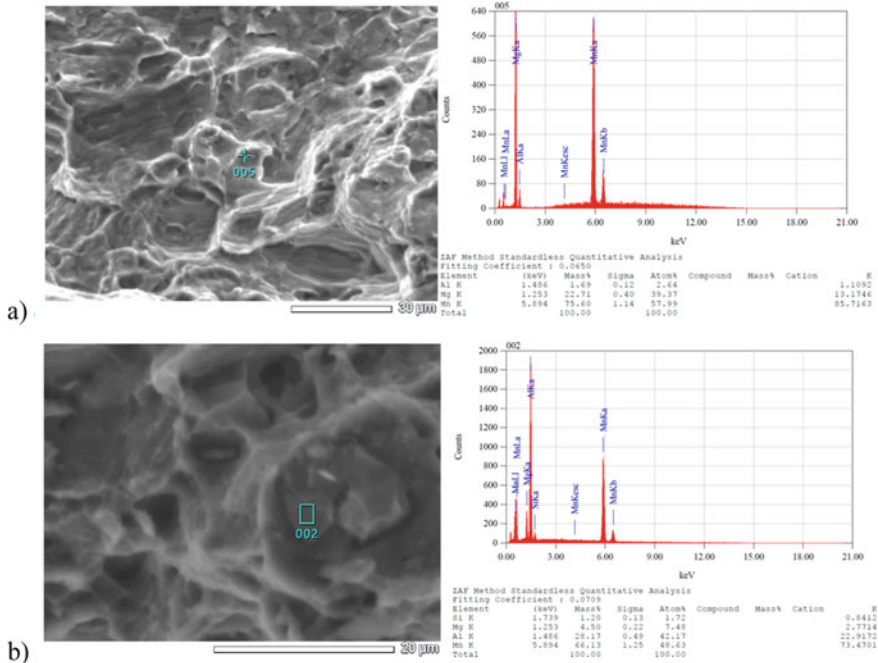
Fracture surfaces of the extruded AM50 alloy after the tensile test: a Non-heat-treated, b Heat-treated
